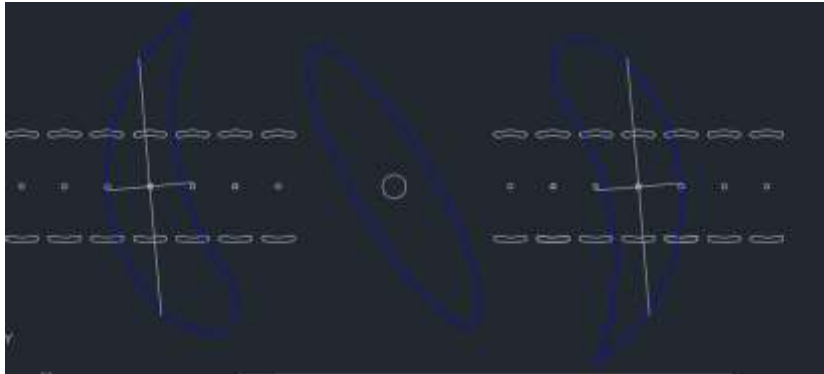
ACAD drawing of the prototype showing the hole holder location and the pitch angle of the airfoil with optimum performance.
